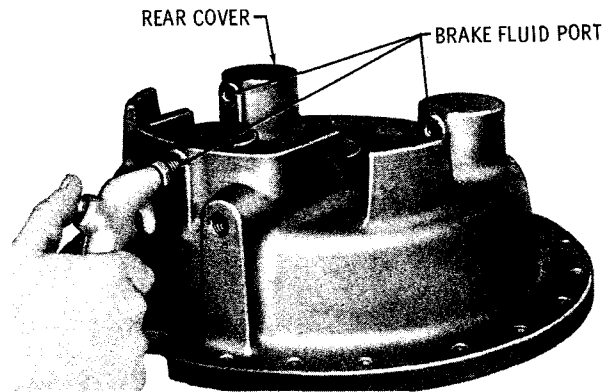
Removing brake pistons from rear cover (TTB)
